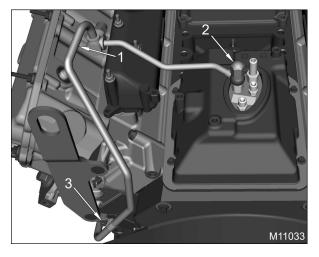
High-pressure pump to cooler tube assembly (upper connection)
